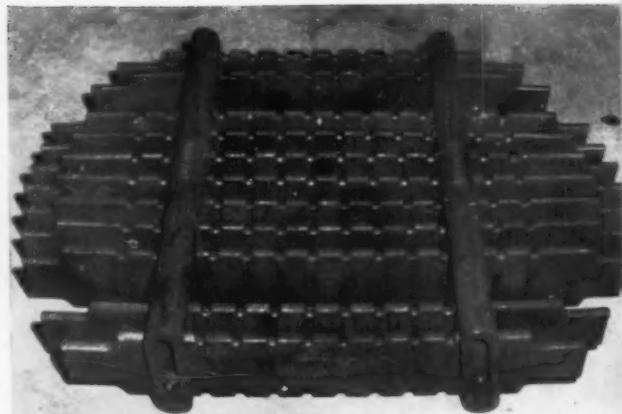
Heat Treating Fixture of Cast Type HT Alloy Used to Support Steering Gear Parts During Carburizing. The cast "leaves" are pinned together to form an articulated grid, and can be replaced individually, when necessary
